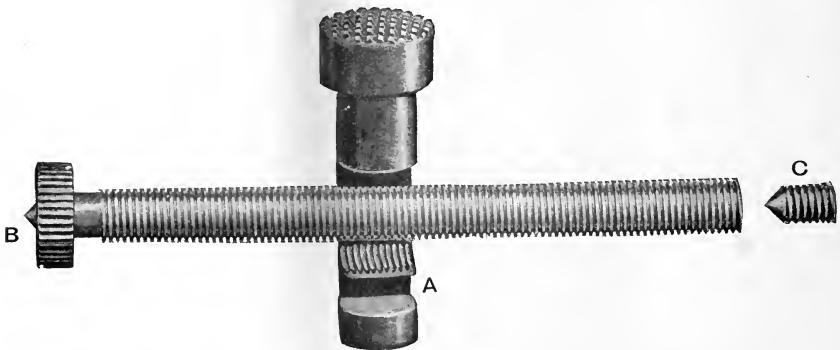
THE WESTLEY RICHARDS ELEVATOR SCREW AND SPRING CLUTCH, SCREWED AT A. B AND C ARE THE POINTS UPON WHICH THE SCREW REVOLVES, C ALSO ACTING AS AN ADJUSTING PIN.
